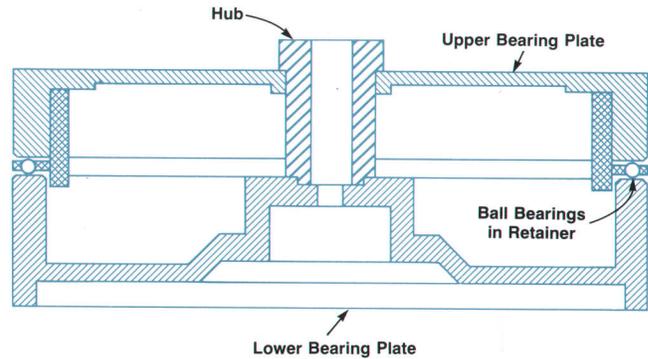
Vertical-axis support bearing cross-section. The upper bearing is supported by three ball bearings that allow it to rotate freely on the lower bearing. The ball bearings are kept in position by a nylon retainer ring.
